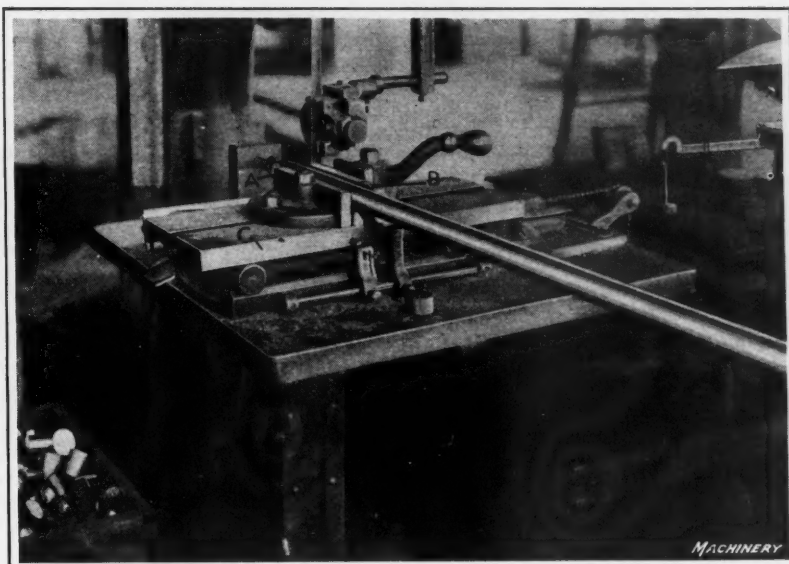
Metal-cutting Band Saw equipped with End Stop, Quick-acting Vise and Traveling Table for rapidly cutting Bars into Forging Blanks
